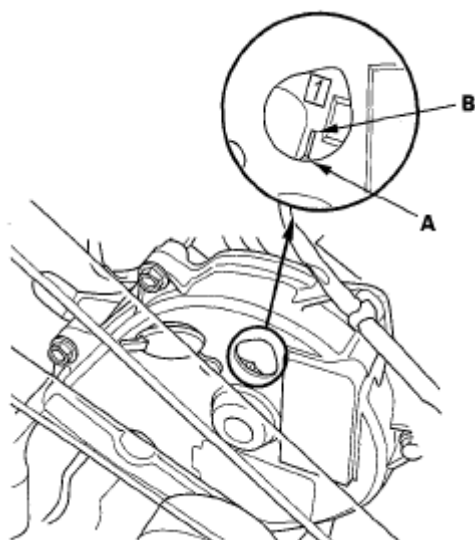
Identifying Front Upper Cover With No. 1 Piston TDC Mark
